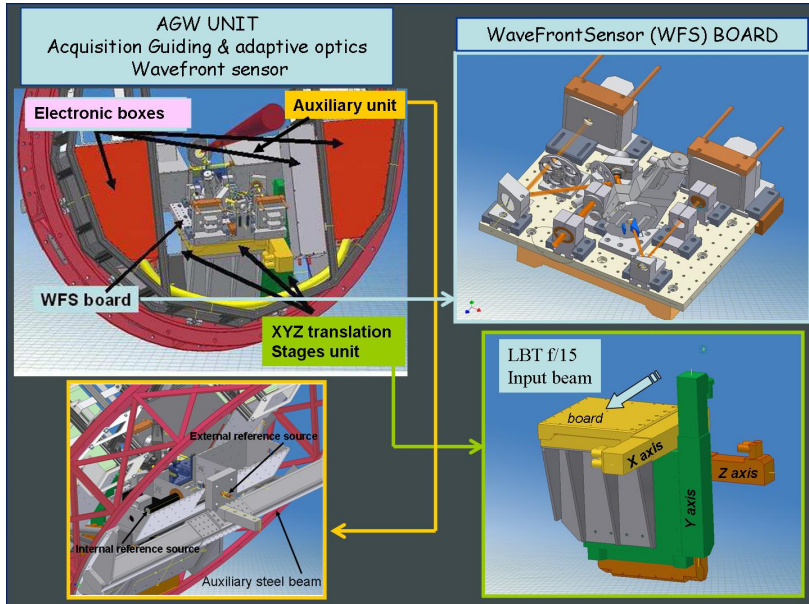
The whole AGW 3d drawing, and the principal components of on-axis AGW:
